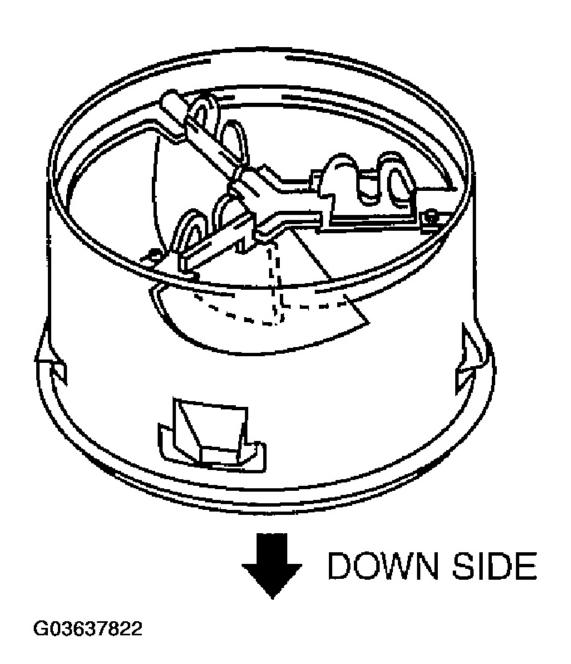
Removing Nonreturn Valve Courtesy of MAZDA MOTORS CORP.
